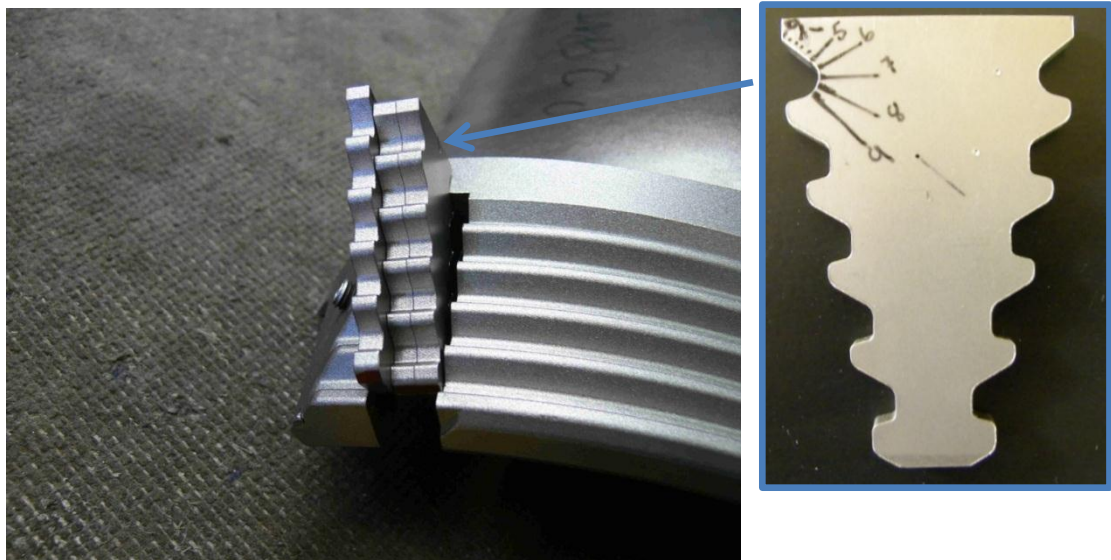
Three fir tree samples after shot peening. The samples were clamped in a cut-out made in an old blade so that the specified shot peening conditions could be achieved
